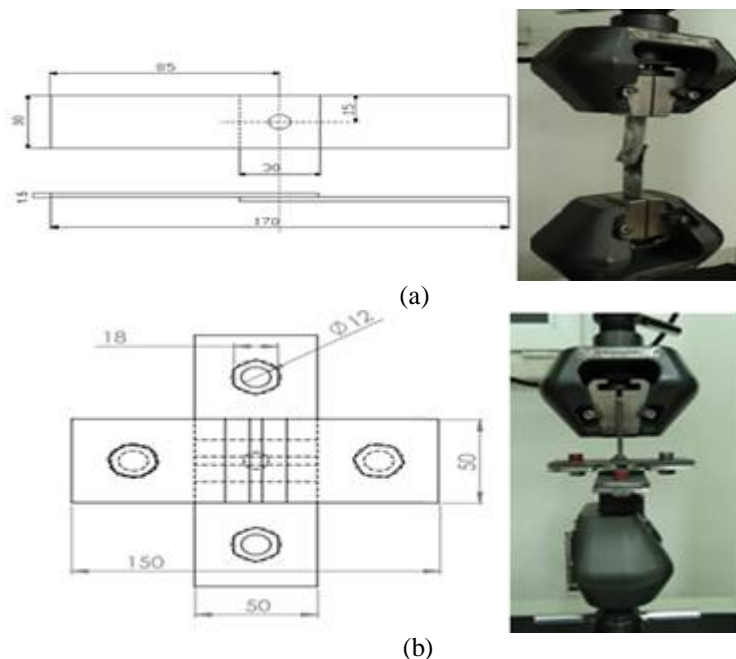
Schematic specimen and testing representation of (a) tensile-shear, (b) cross-tensile specimen
